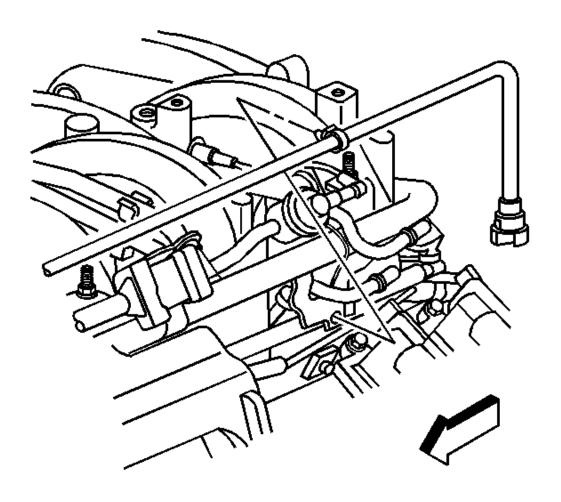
View Of EVAP Tube At Fuel Rail Courtesy of GENERAL MOTORS CORP.
